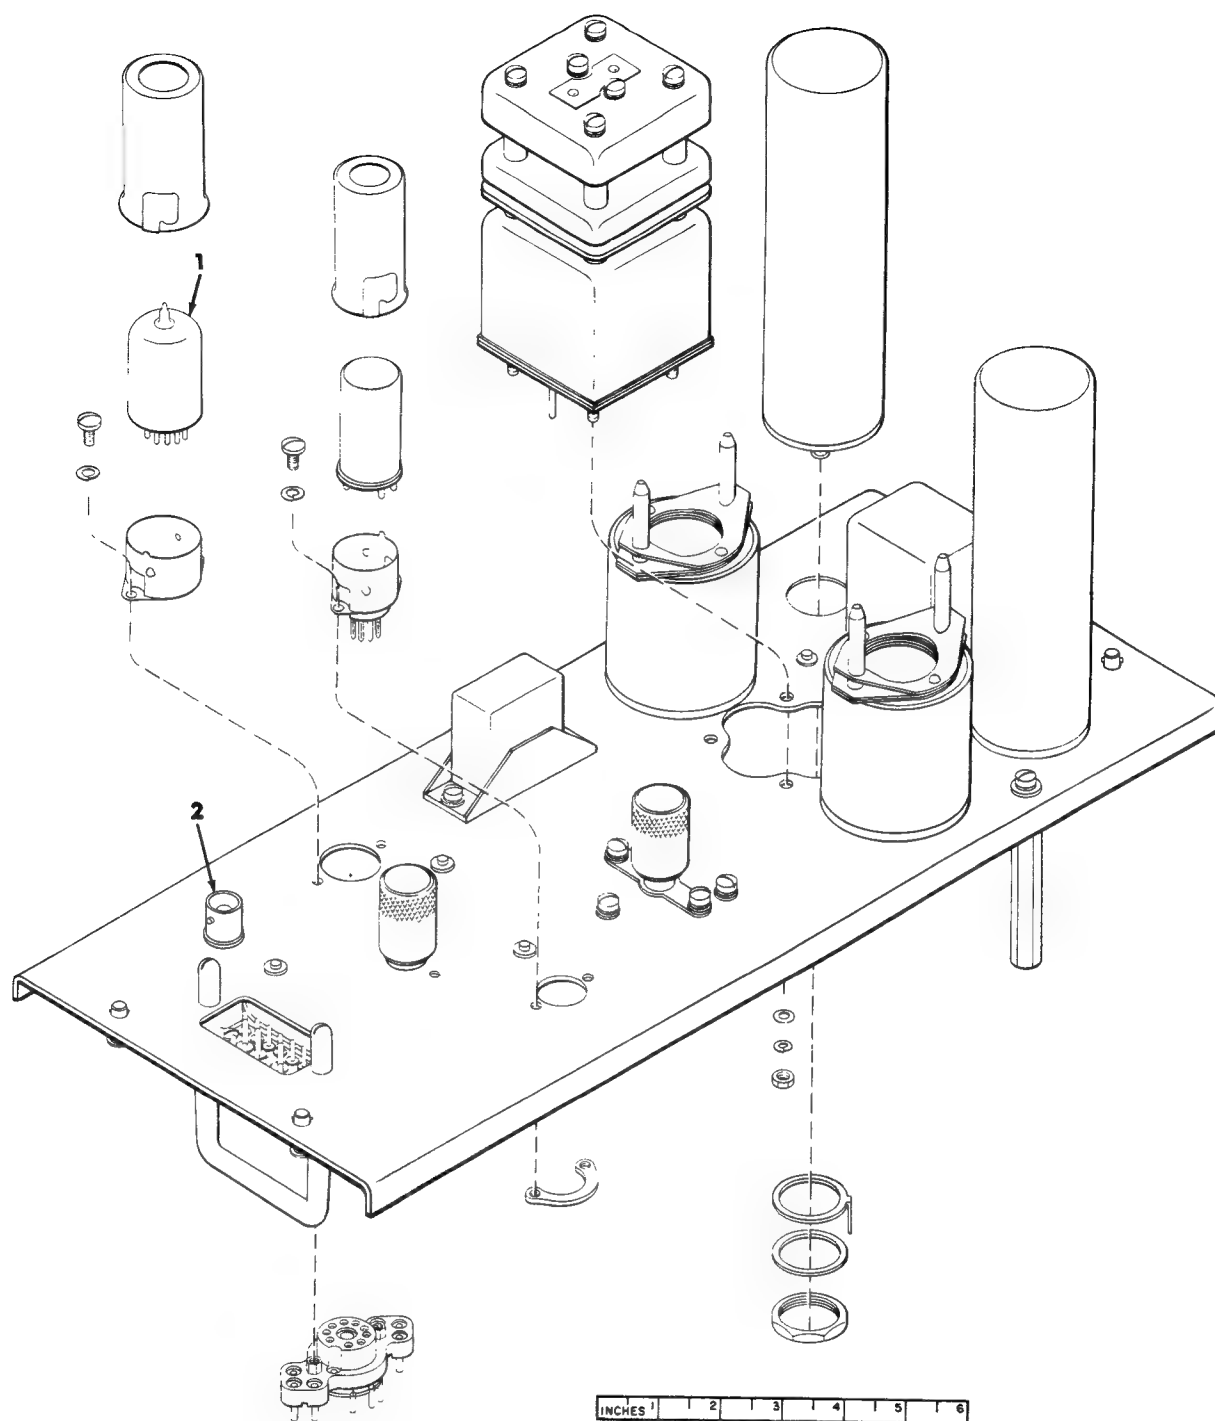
Generator, pul. G-30 (10) (S007726)—partial exploded view
